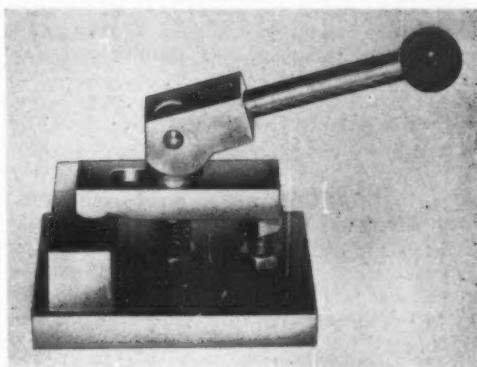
Centre-cam Clamp Assembled Entirely from Purefoy Standard Parts
